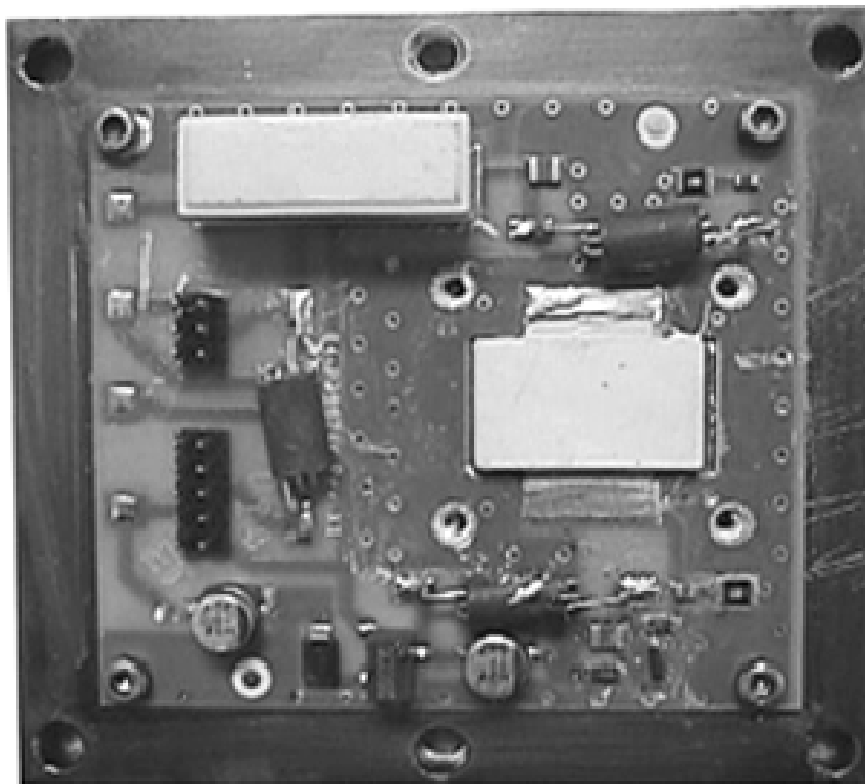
Power Cycling Test Samples Used to Check the Reliability of Solder Joints
